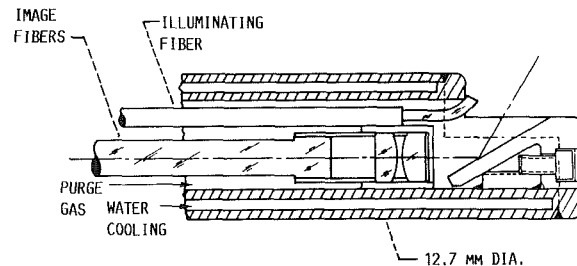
(b) Cross section of narrow field of view combustor viewing probe
